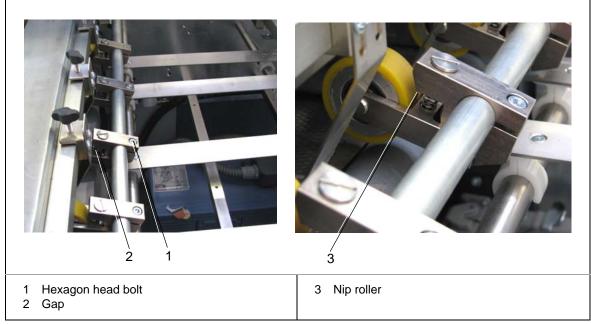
Adjusting nip rollers of the second in-feed shaft.
